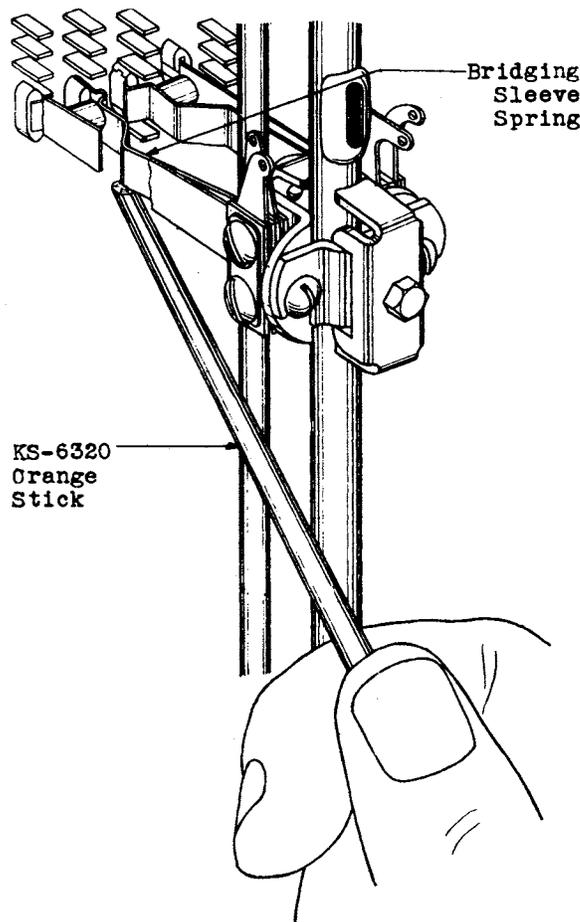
Method of Raising Bridging Sleeve Spring to Check Vertical Adjustment
